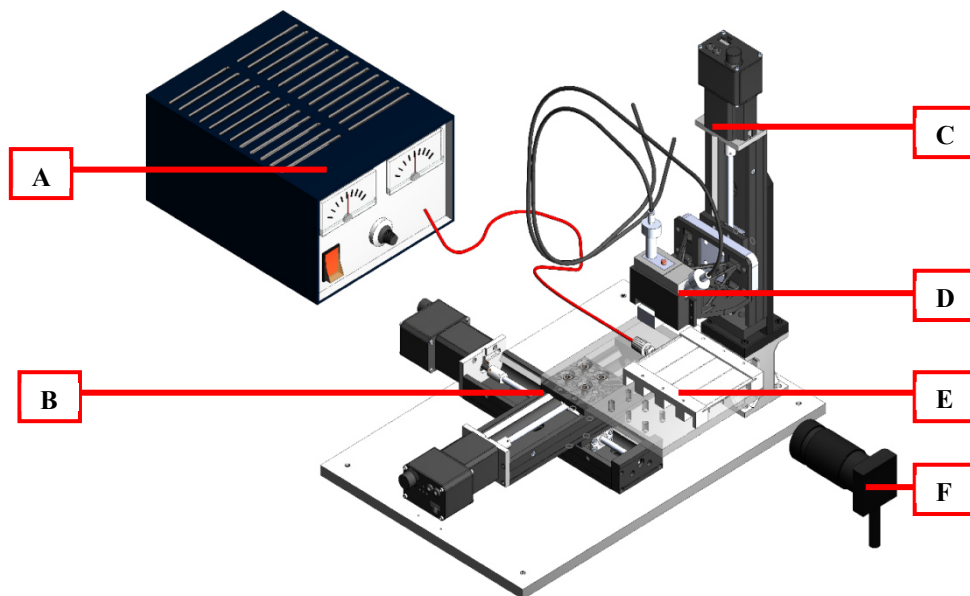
Schematic of the assembled MEW system with HV supply (A), X-Y stages (B), Z stage (C), coaxial tool head (D), collector (E) and USB camera (F).
